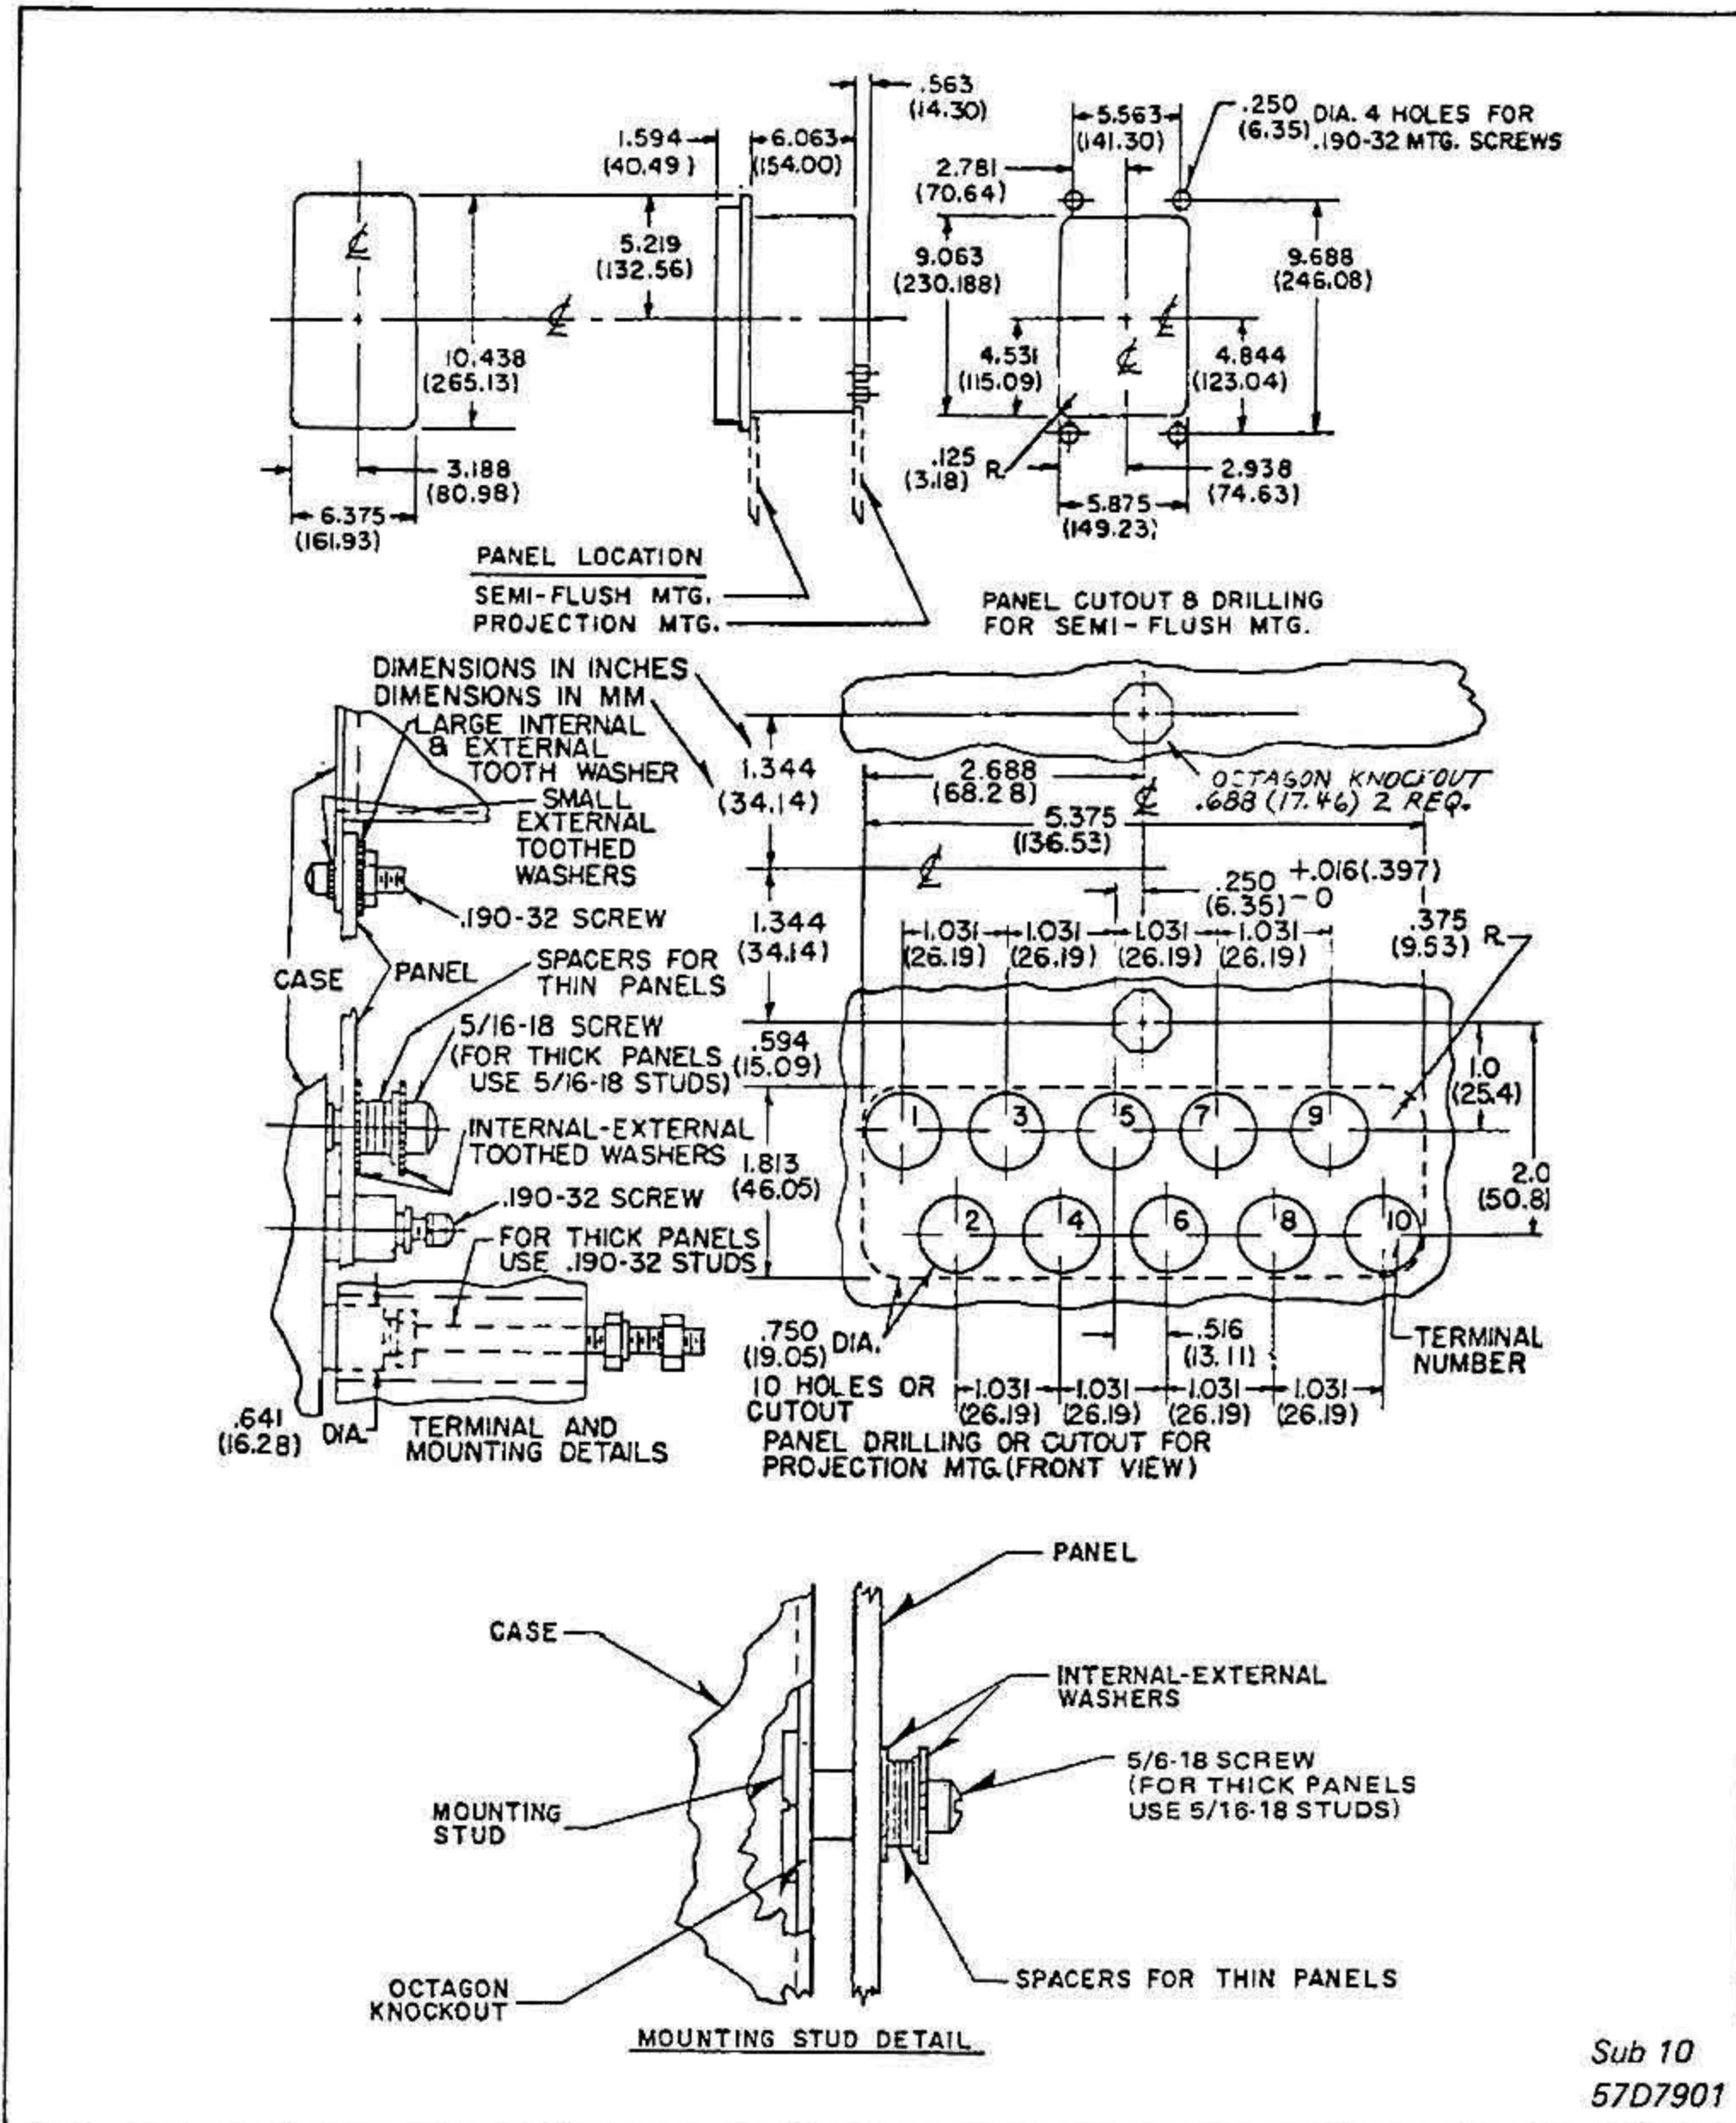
Outline and Drilling Plan for Relay in FT-21 Case.
